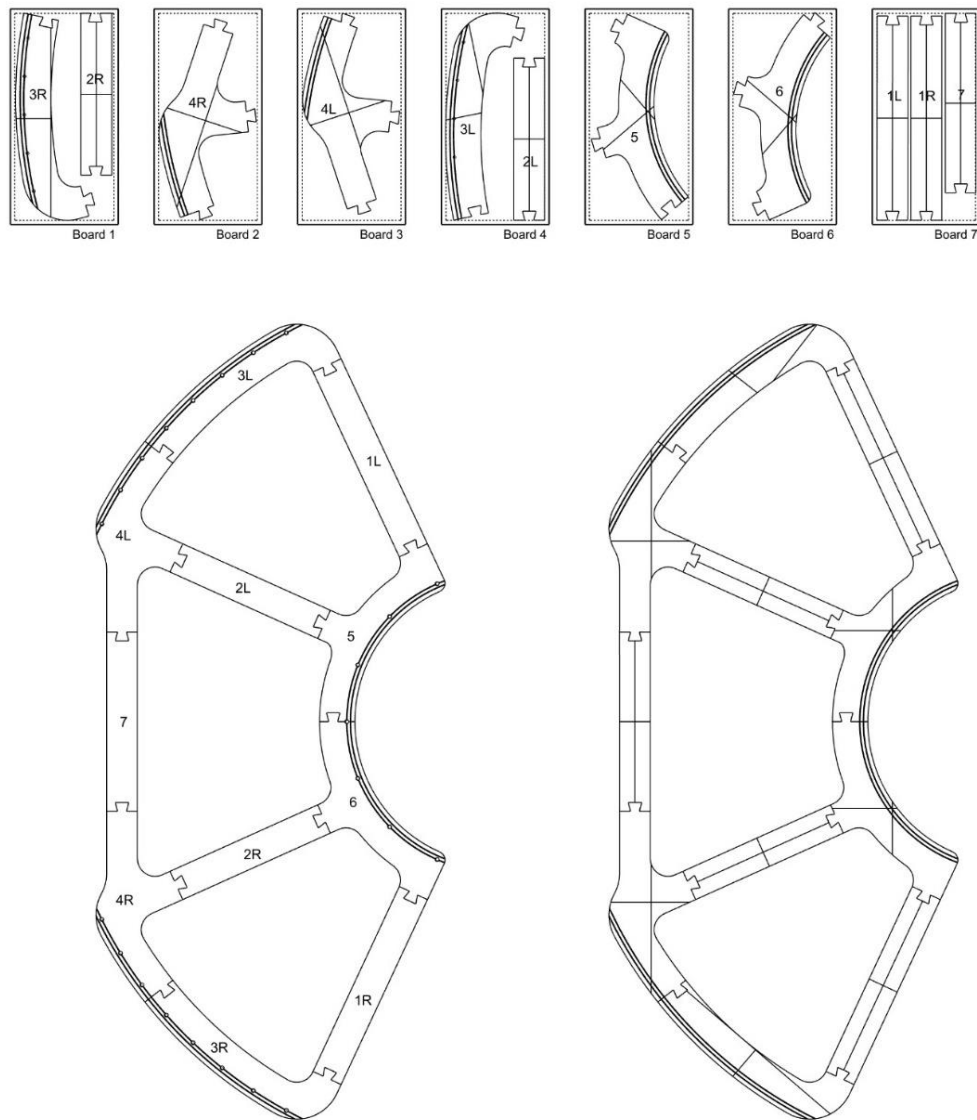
Base plan and the boards for the CNC fabrication.
